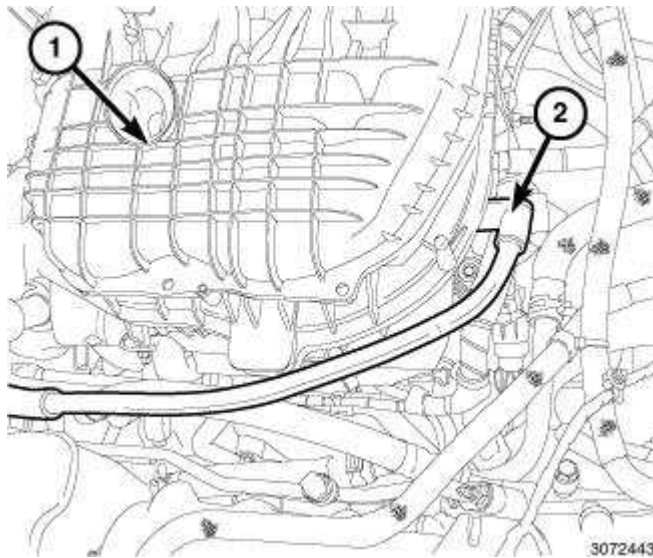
Fresh Air Makeup Hose At Rear Of Intake Manifold
